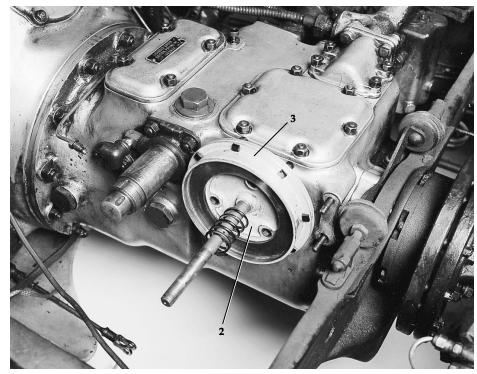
Disc drum (3) shown attached to driving plate by eight 3/16" BSF bolts.
